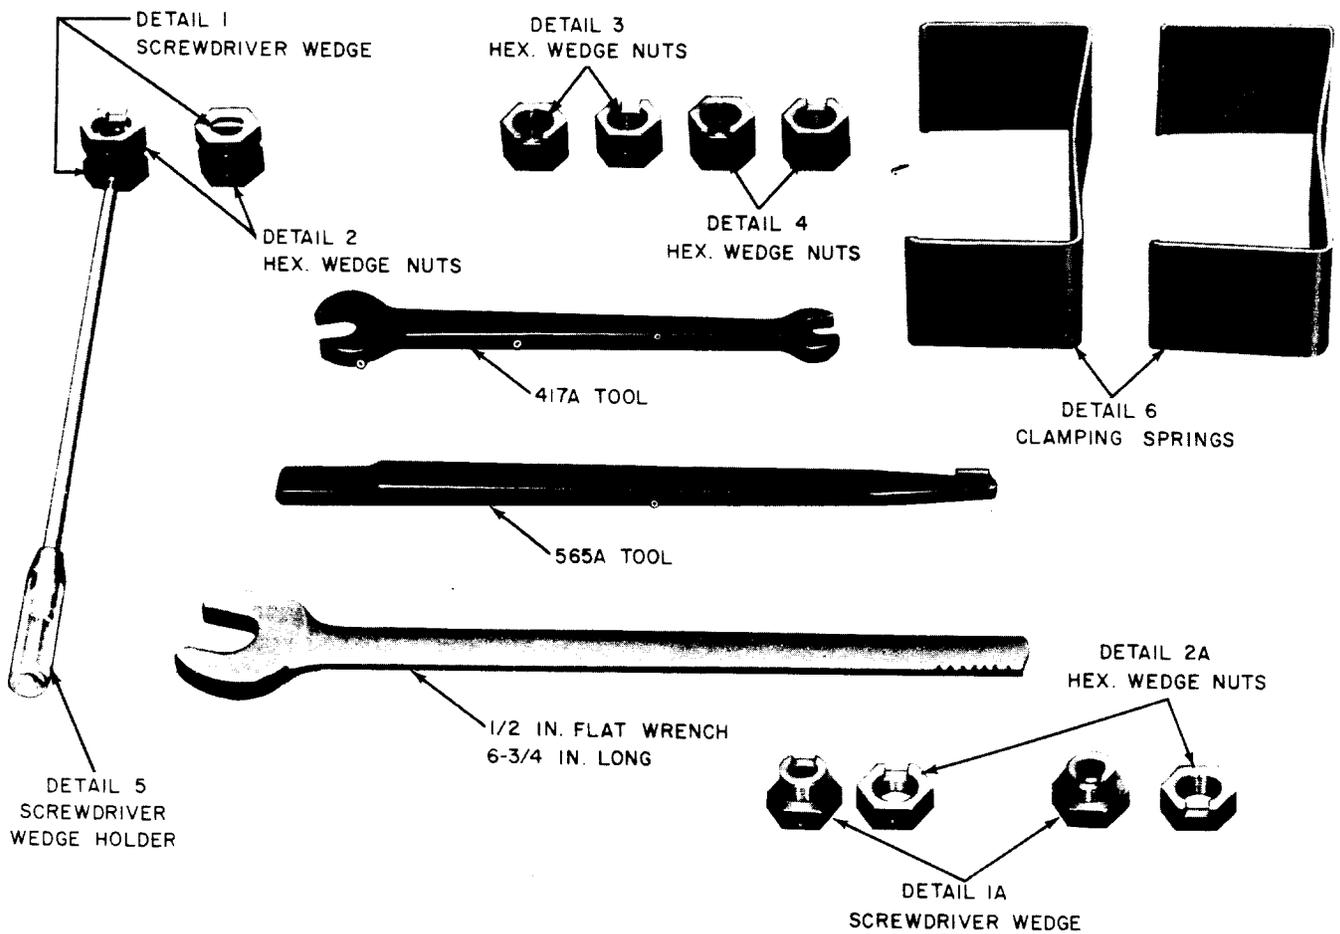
KS-20558 L1 Tool Kit (KS-20557 L1 Carrying Case Not Shown)
